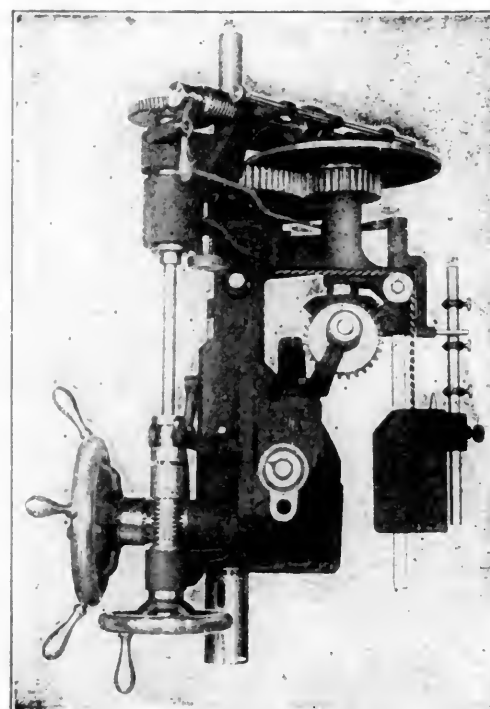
END VIEW OF HEAD UPON ARM, SHOWING FRICTION-PLATE FEEDING MECHANISM.
